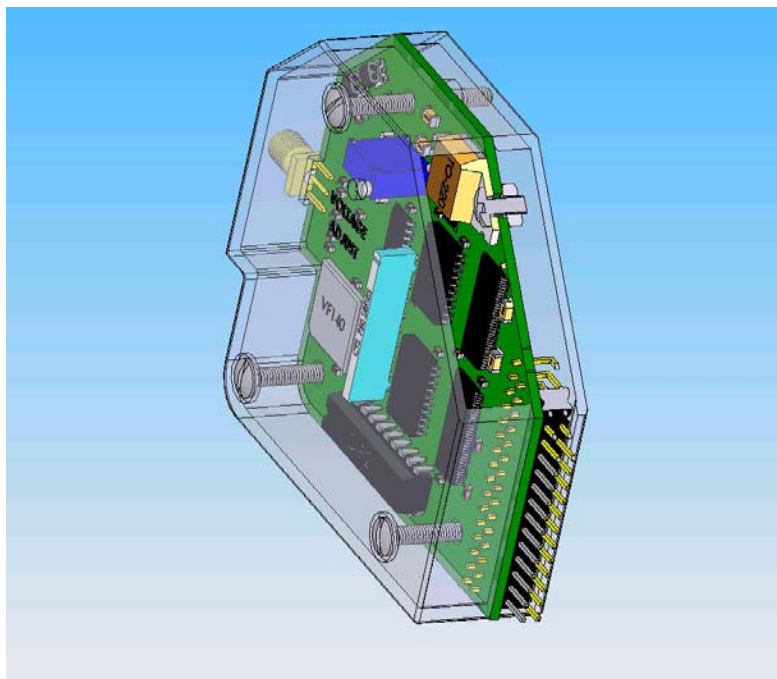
3D definition of PCAD PCB with correct component plane orientation. Front and Back metal lids removed for clarity.
